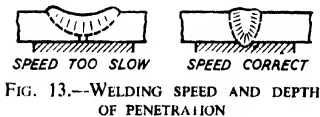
WELDING SPEED AND DEPTH OF PENETRATION
